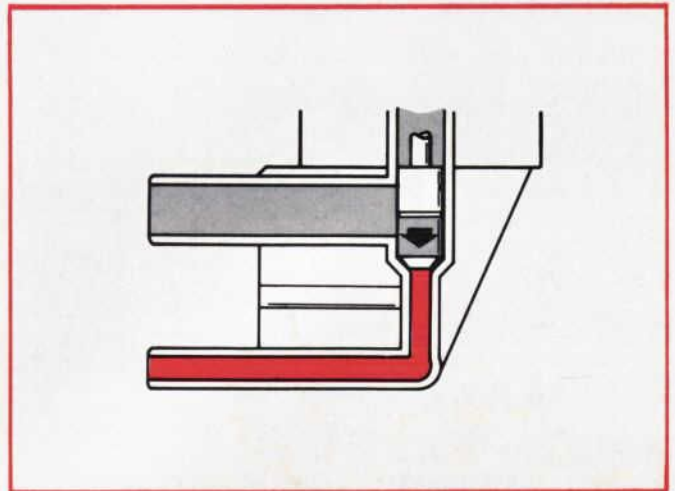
A—Solenoid Valve Closed to Carburetor Spark Port
